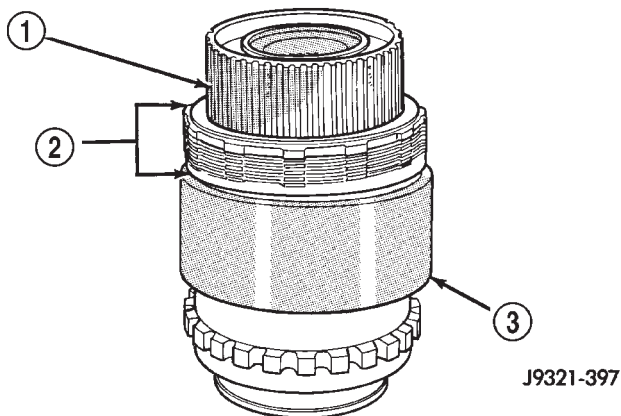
Direct Clutch Pack And Clutch Hub Installation
